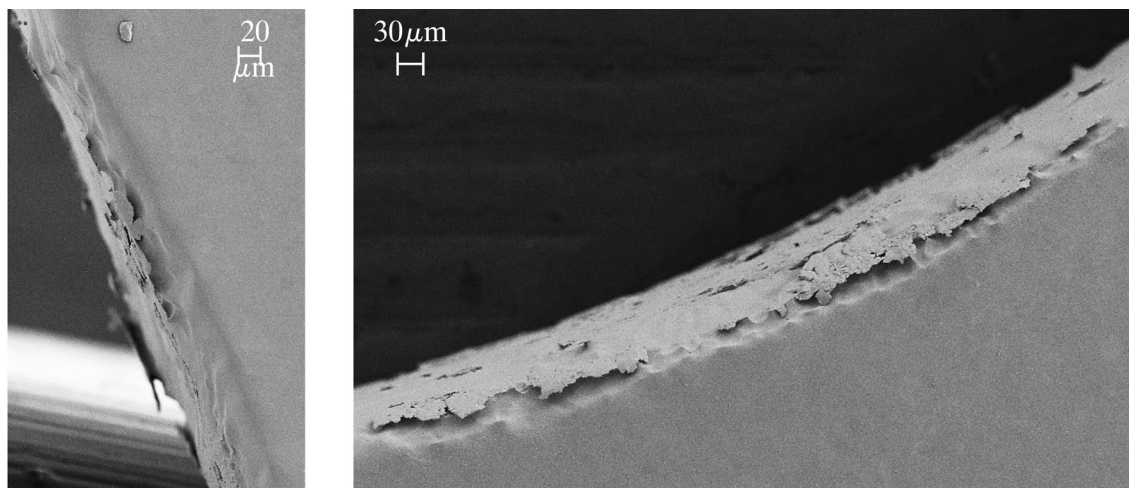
Scanning electron microscope picture of protruding parts at the inner surface of the hole wall. Left: the hole of sample 7-SS-ep-3 is shown in this picture. Right: here sample 8-SS-ep-3 is shown. Overall the protruding part has a length of more than 0.6 mm.
